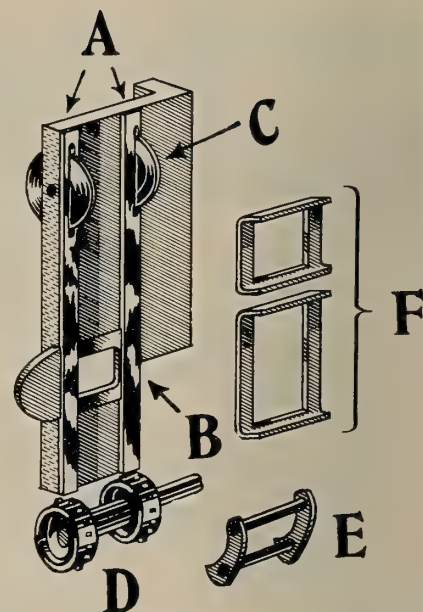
Component parts of the film gate: A, the film runners; B, the aperture plate; C, the flanged lateral guide rollers; D, the intermittent sprocket; E, the intermittent-sprocket shoe, and F, the gate-tension pads.
